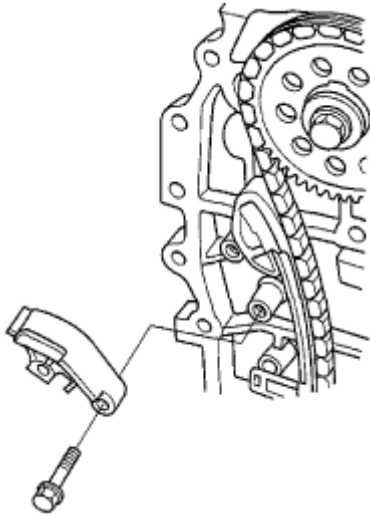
Locating Cam Chain Tensioner Slider And Bolt
